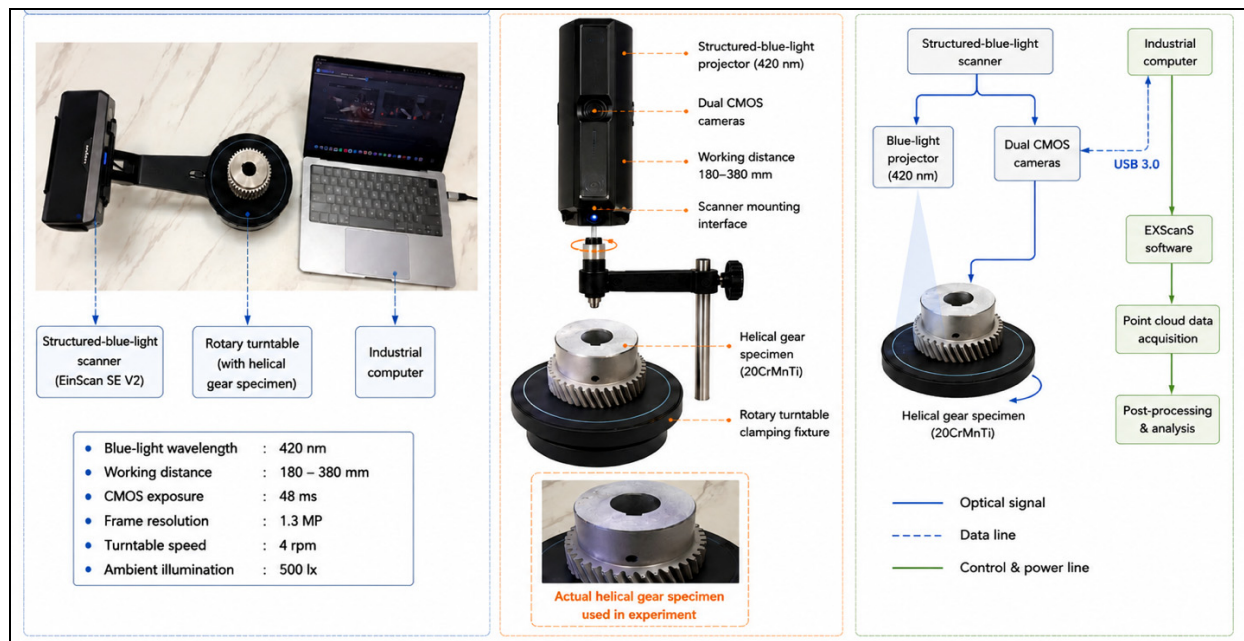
Experimental setup and working principle of structured-blue-light 3D scanning for helical gear inspection. a) Complete hardware system of structured-blue-light scanning for helical gears (b) Partial assembly diagram of scanning system (c) Working principle diagram
